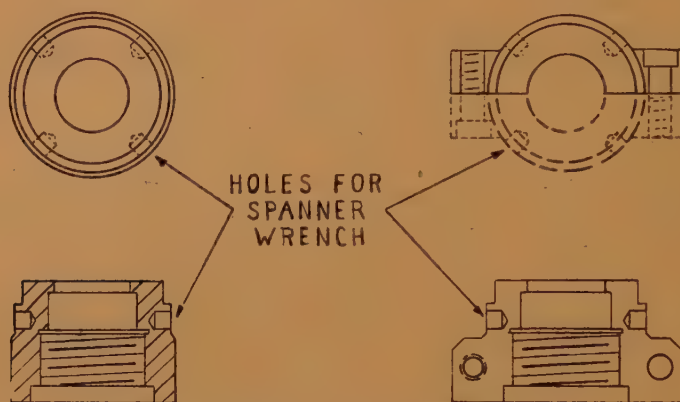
CLAMP NUT FOR LOWER PUNCH HOLDER.
